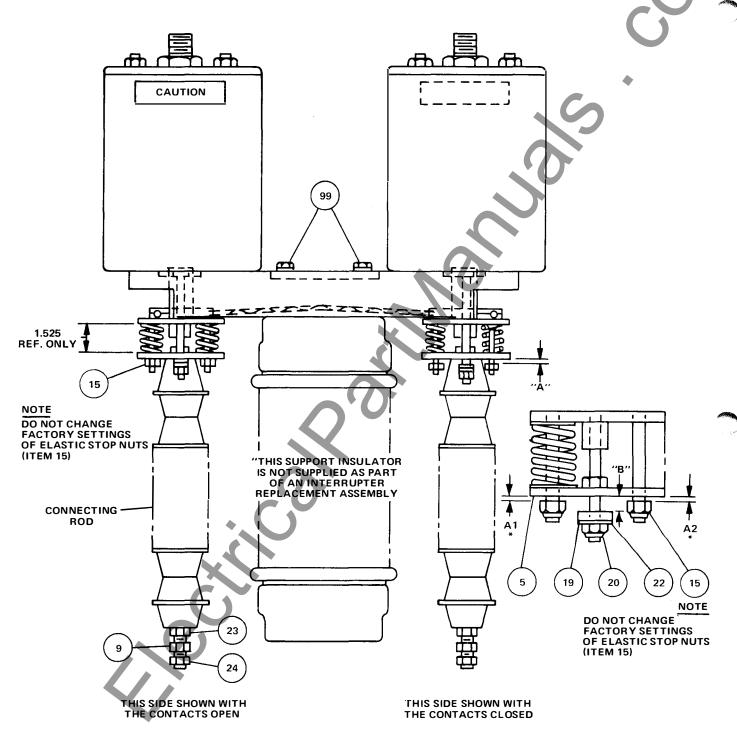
VV1500 Vacuum Circuit Breaker Barrier Assembly Removed
